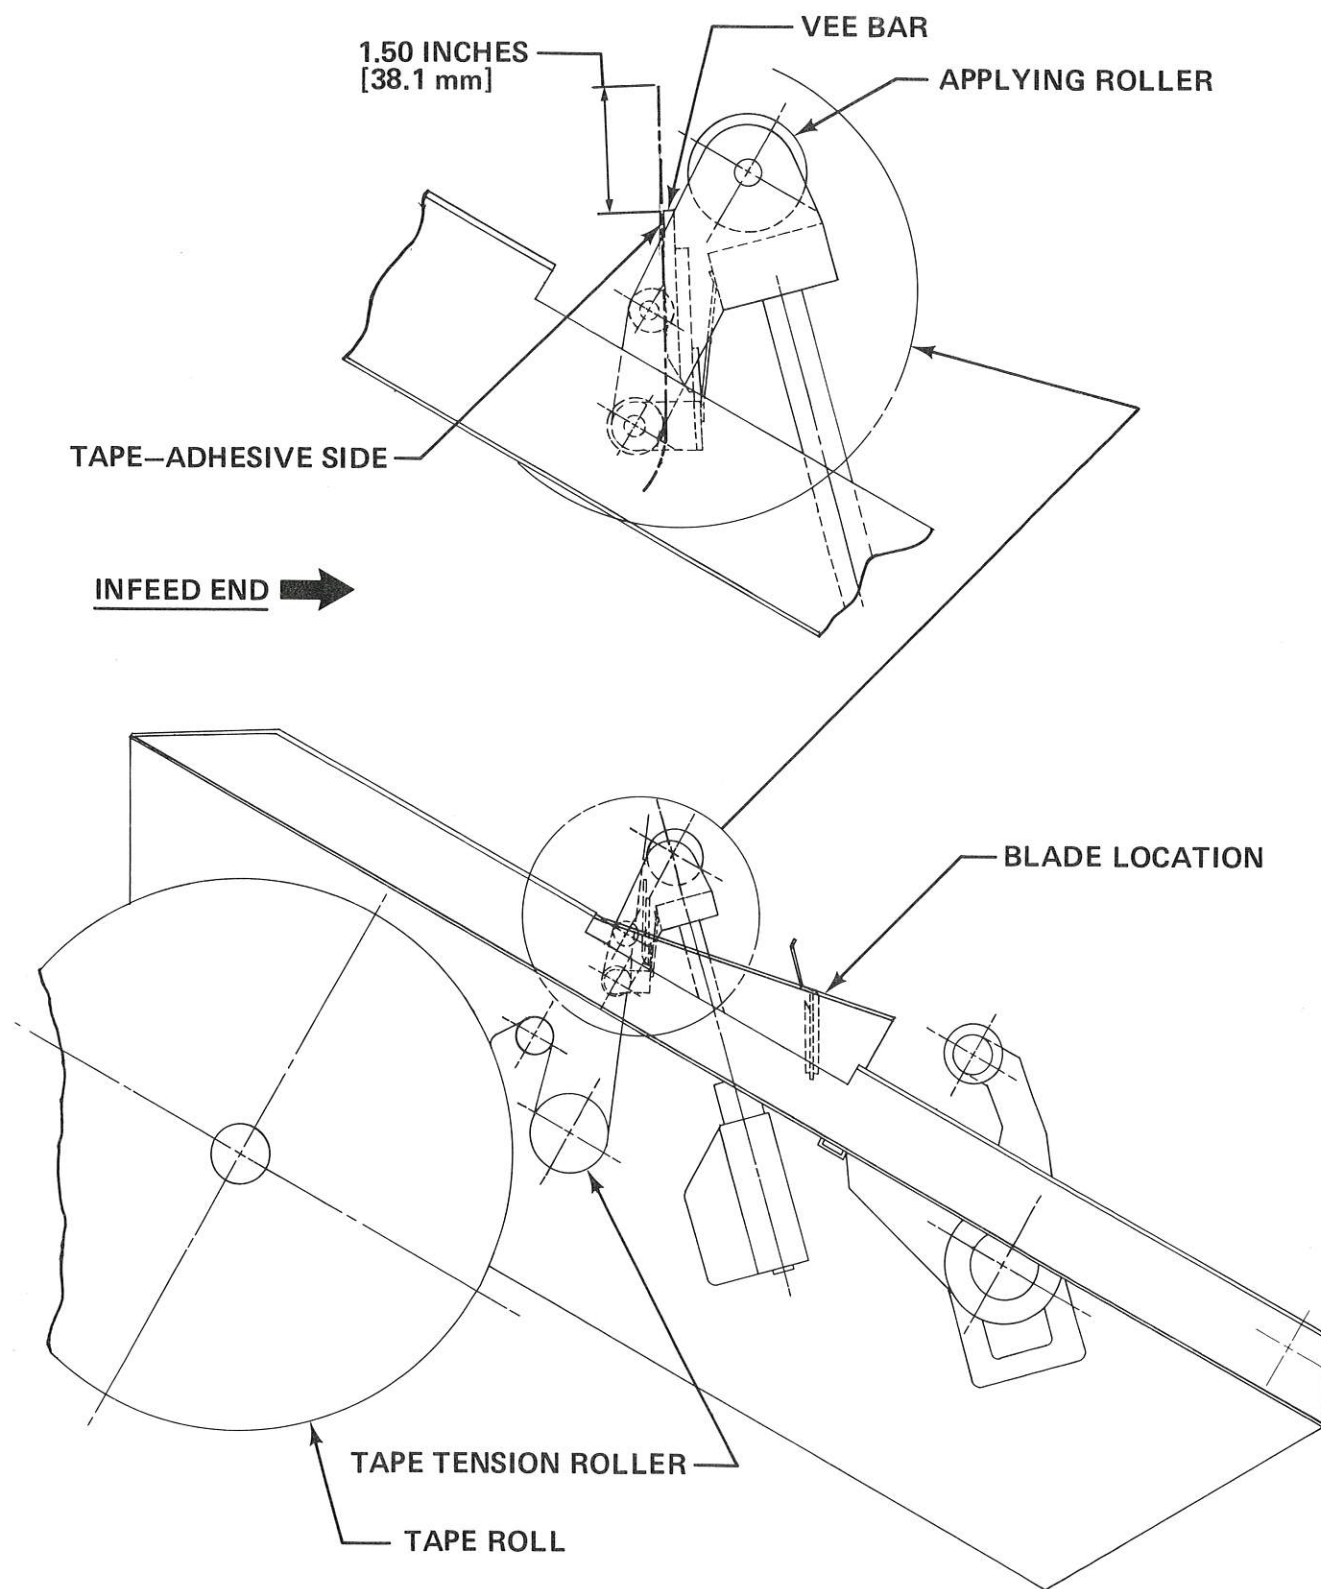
TAPE THREADING DIAGRAM - LOWER TAPING HEAD RIGHT SIDE VIEW
